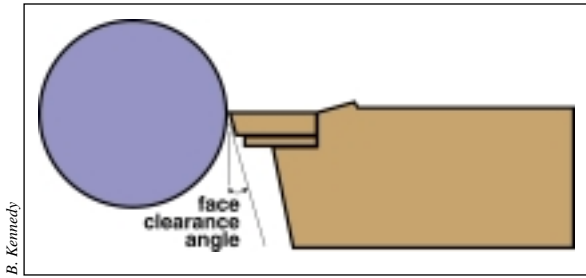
An insert's front and side rakes determine the clearance between the flank face of the insert and the workpiece.
